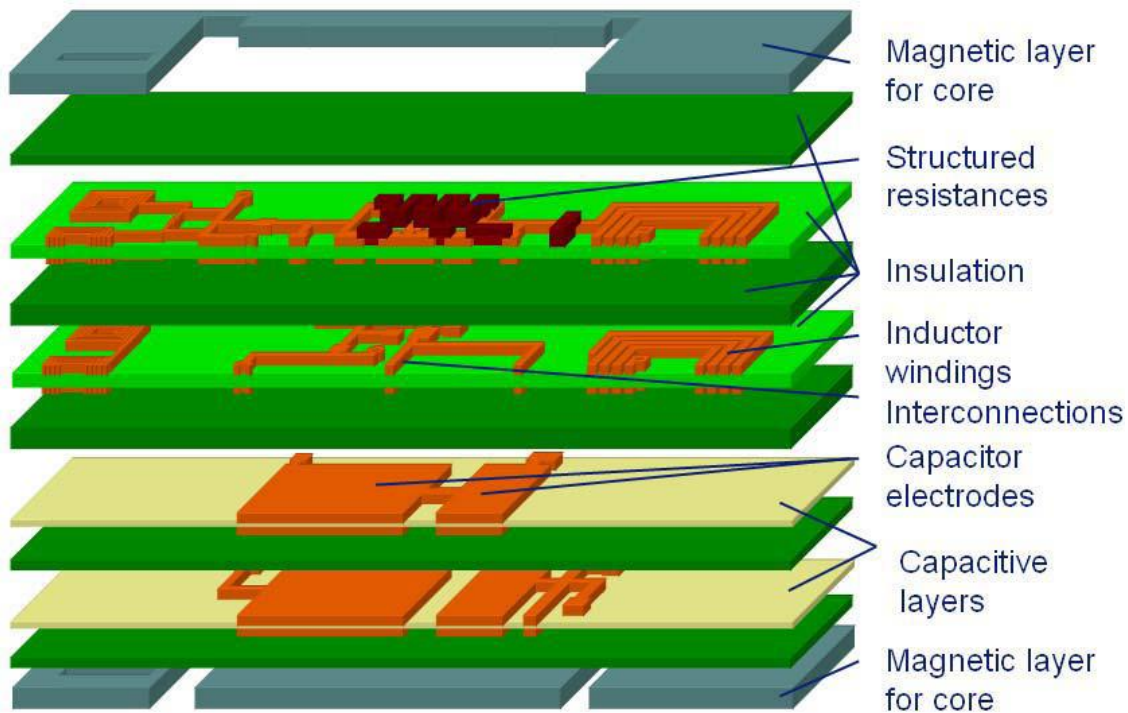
Multi-layer PCB substrate with embedded layerwise magnetic core [45].
